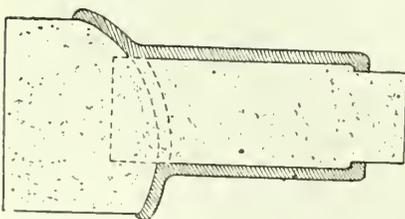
Same casting being molded on its side with two cores fitted together to form the inside.
